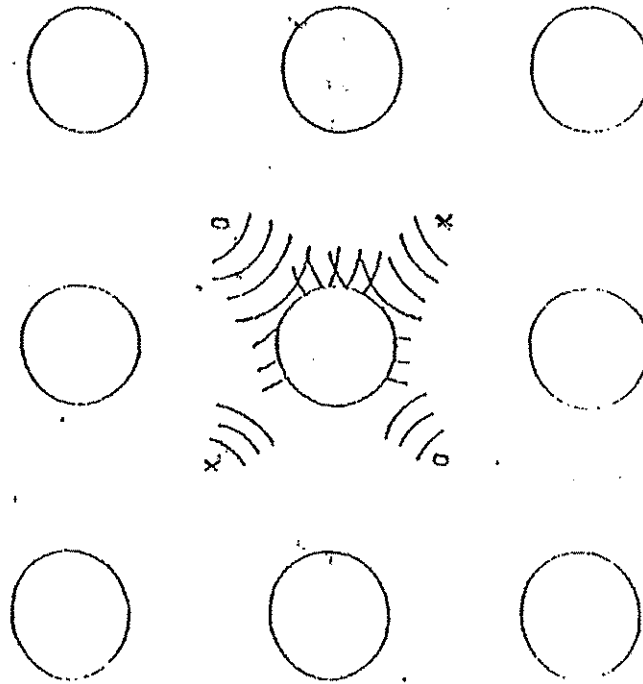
TECHNIQUES FOR EXAMINATION OF FILLET WELDS
